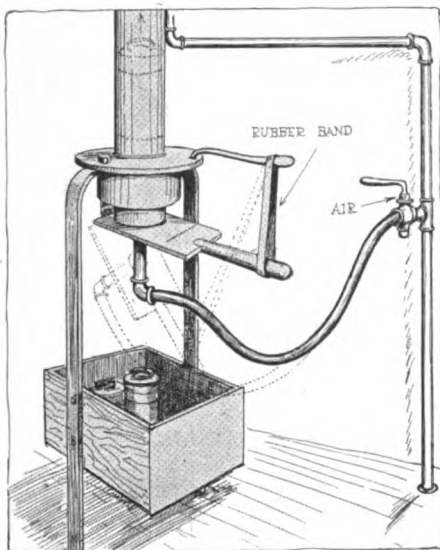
The tube is closed by a home-made valve held in place with a rubber band; the compressed air is let in through the center
